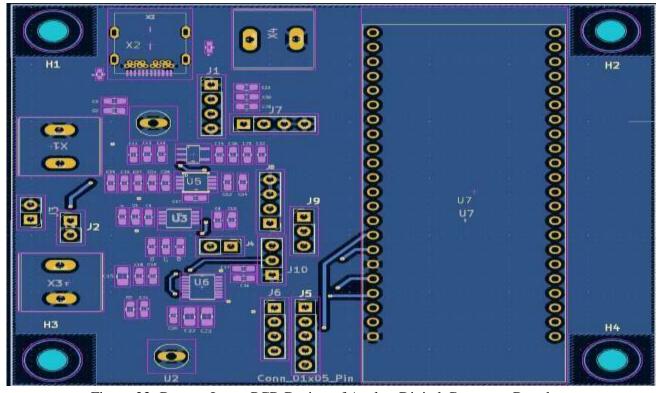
Bottom Layer PCB Design of Analog-Digital Converter Board
